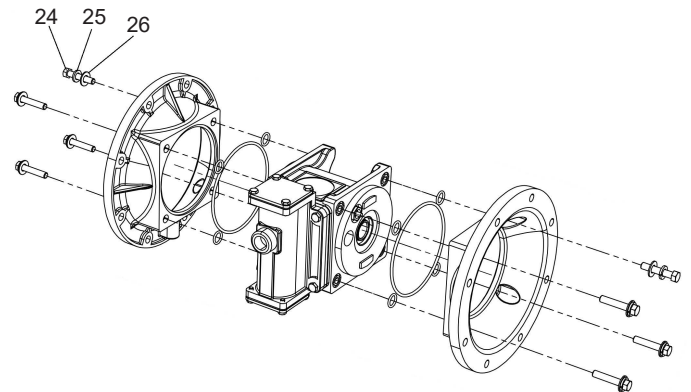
Disassembly of air chamber 内腔体拆卸
